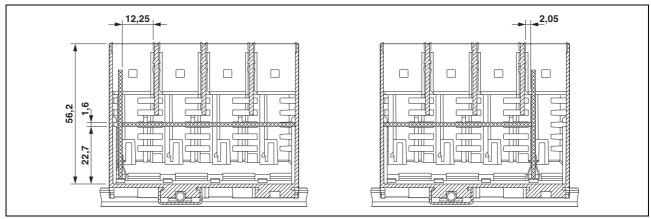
Inside view (horizontal and vertical PCB, overall width 75.2)
